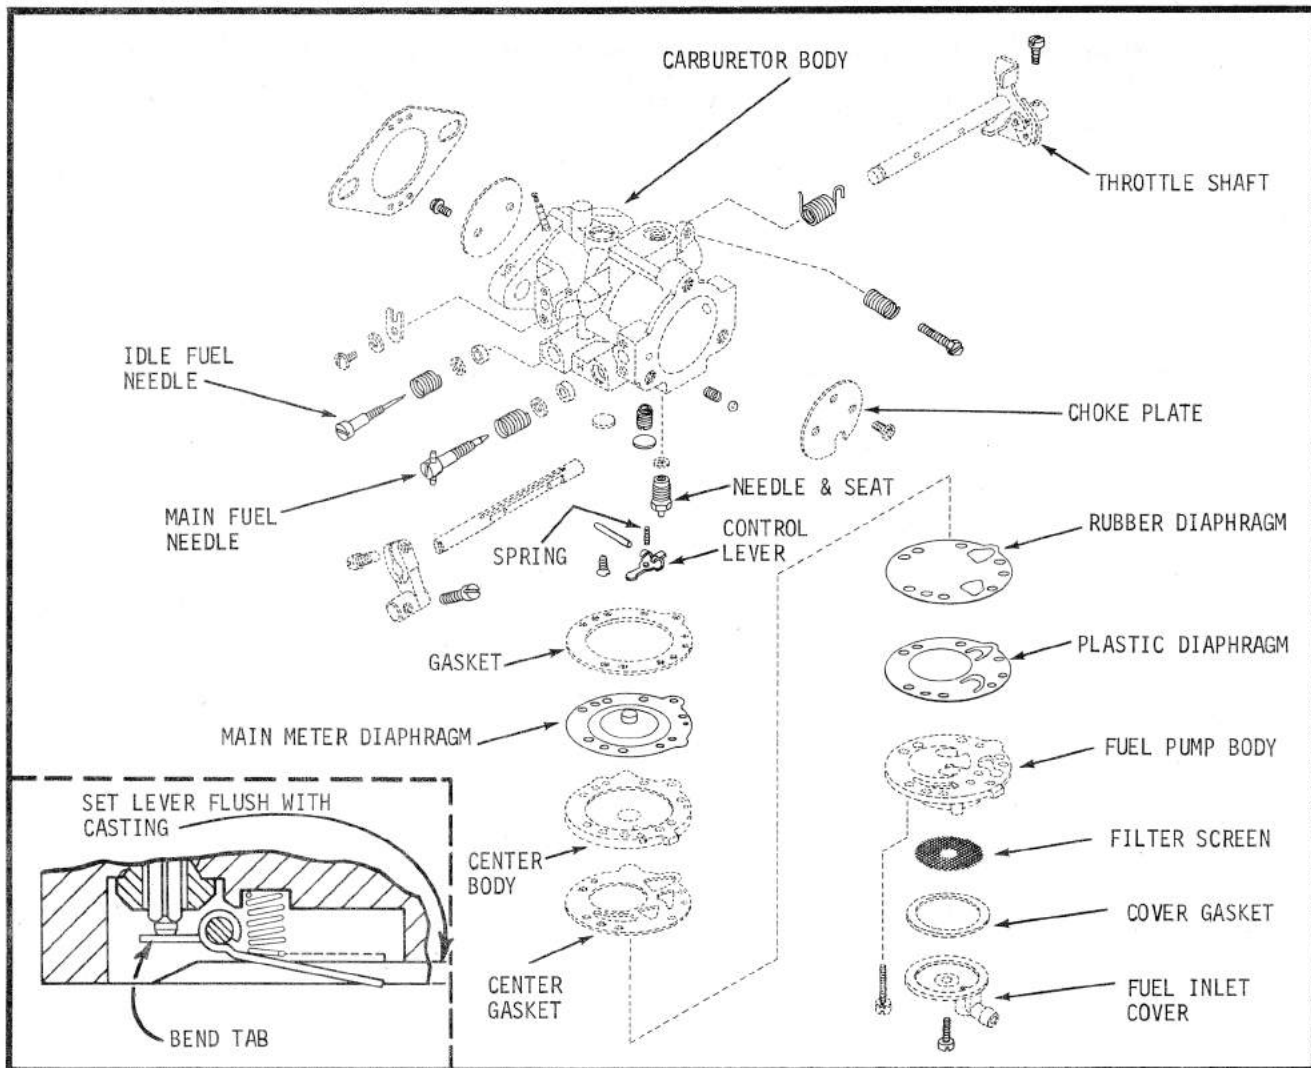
EXPLODED VIEW: TYPICAL HR TYPE CARBURETOR
